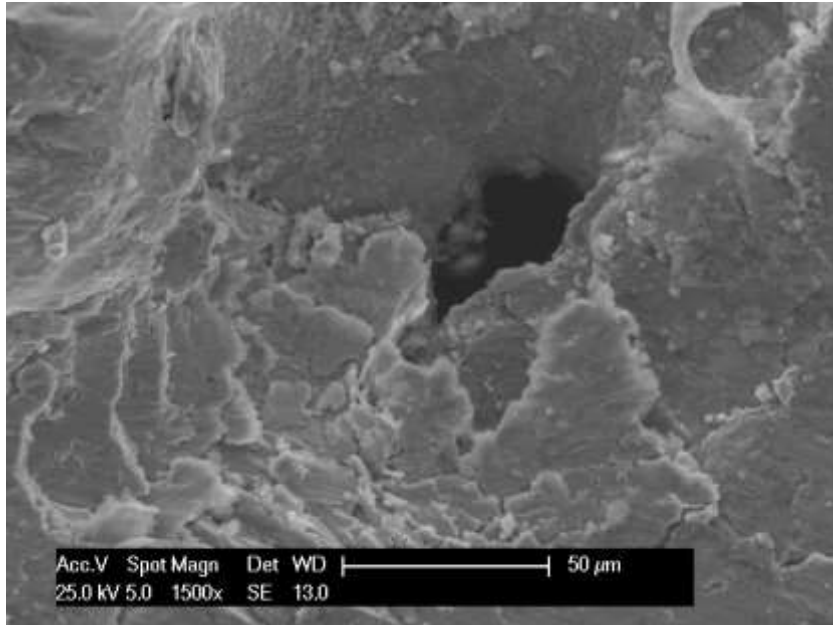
Cleavage facet indicating quasi-brittle fracture mode of the clad layer of a 420 stainless steel clad sample
